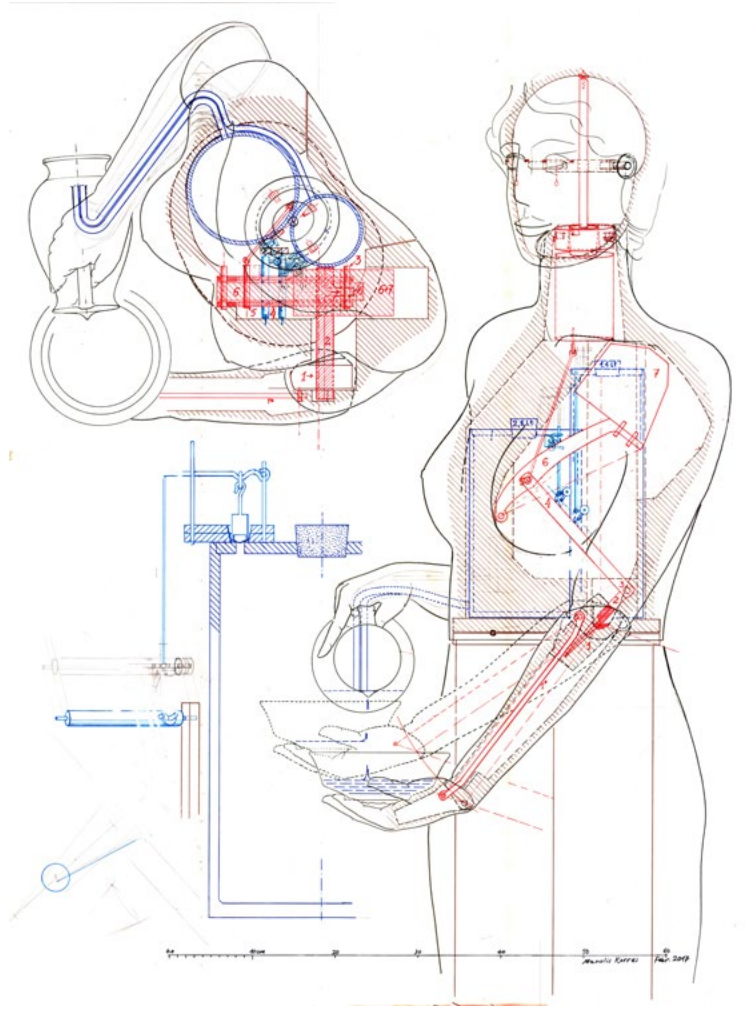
Vertical-oblique section and view of upper part, showing mechanisms. Hand drawing (February 2017, partially revised).
